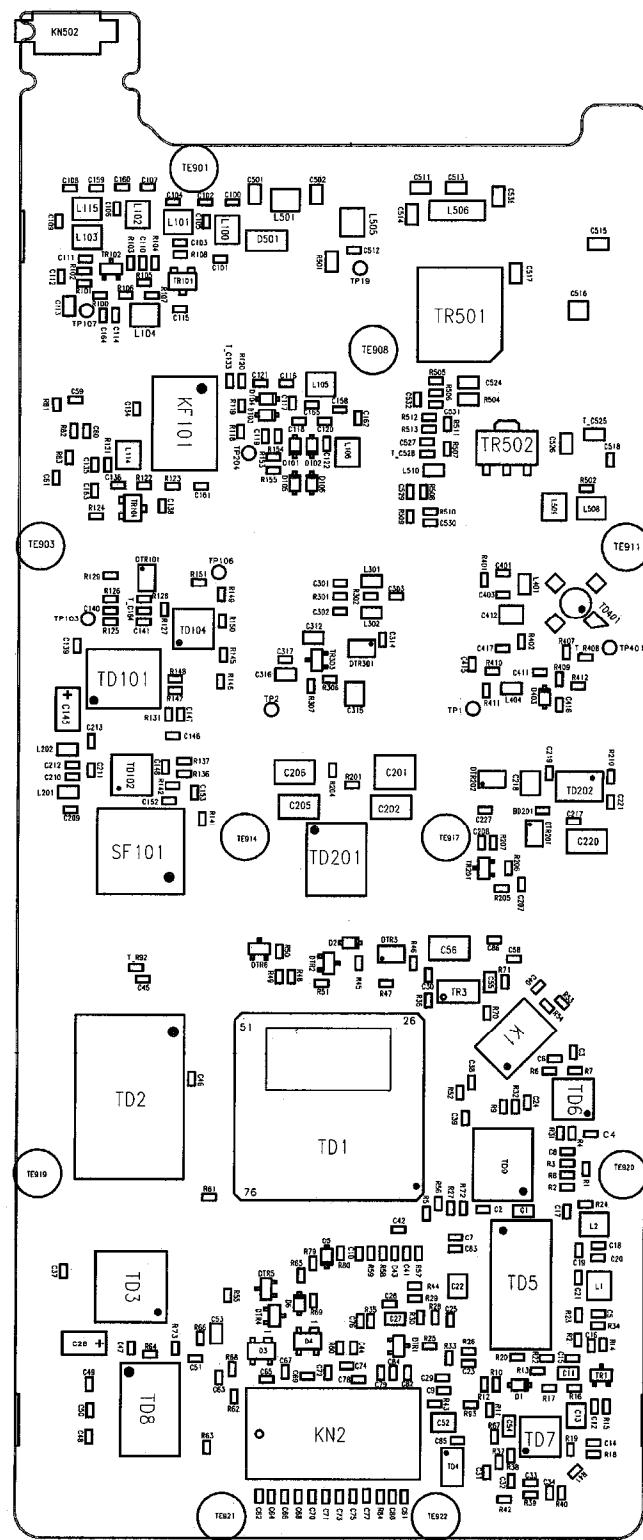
VHF RF and Control PCB Assembly Top Side
